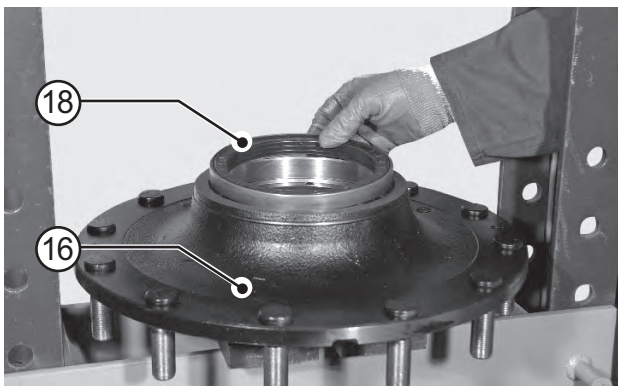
Apply a jointing compound for seals to the outer surface of the sealing ring (18). Position the sealing ring (18) in the hub (16).
